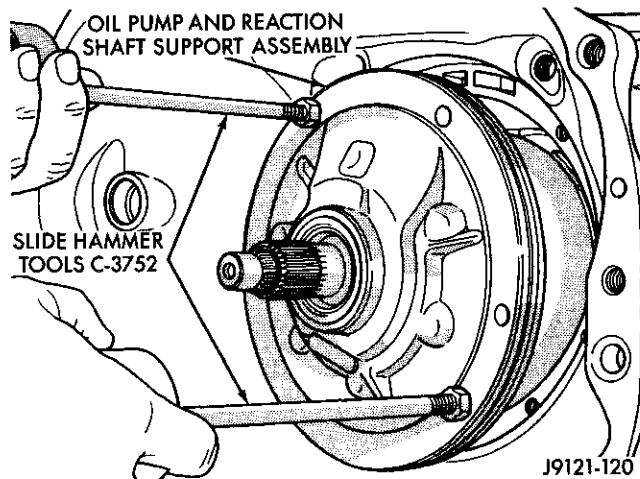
Removing Oil Pump And Reaction Shaft Support Assembly
